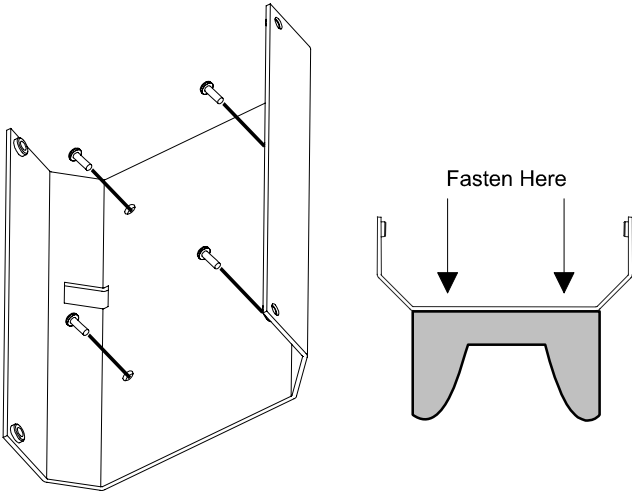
Fasten Backplate Assembly to DC Singledock
